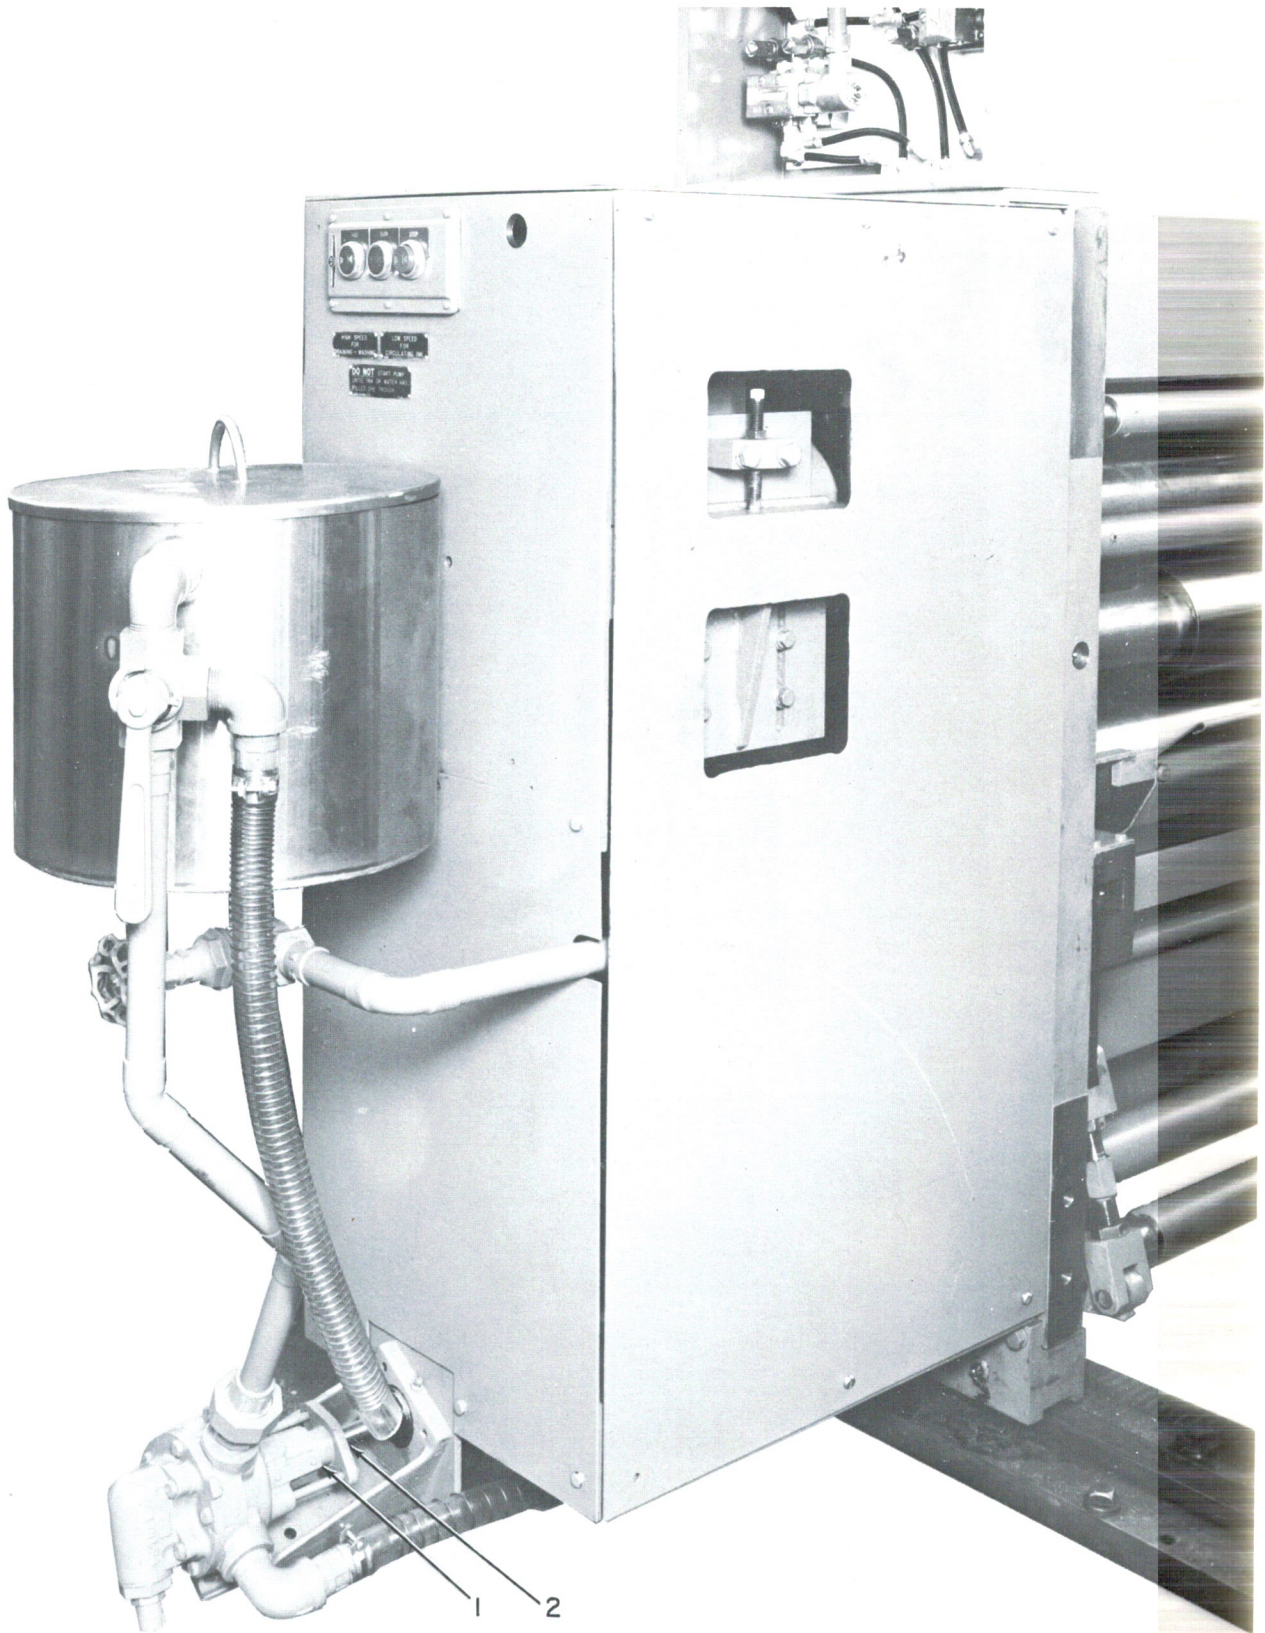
PRINTING UNIT LUBRICATION, DRIVE SIDE VIEW
